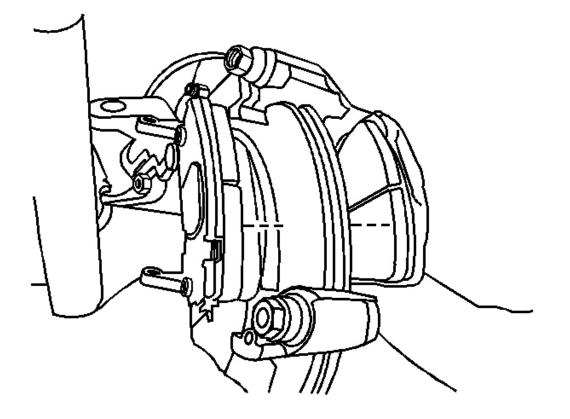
View Of Caliper To Caliper Mounting Bracket Courtesy of GENERAL MOTORS CORP.
